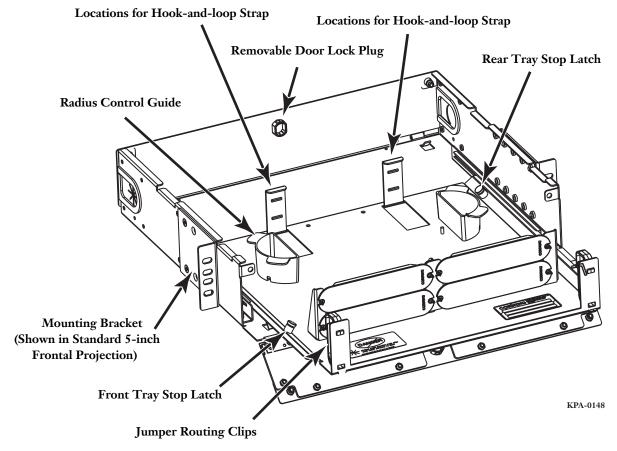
Components of PCH-02U (Top Removed for Clarity)
